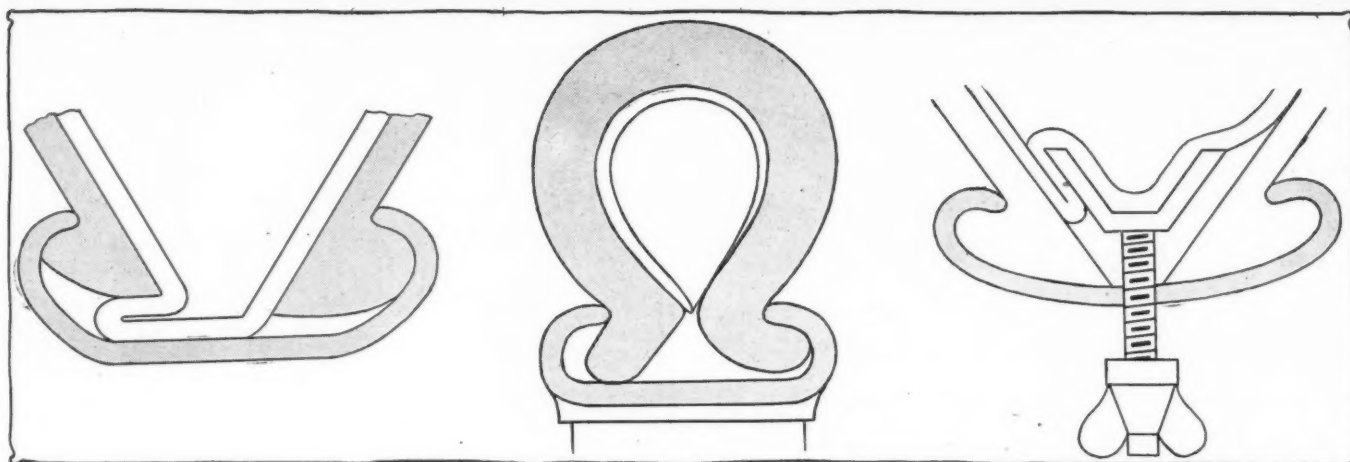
Showing how the inner tube may be pinched between the bead and the casing, the bead and the security bolt or the two beads
